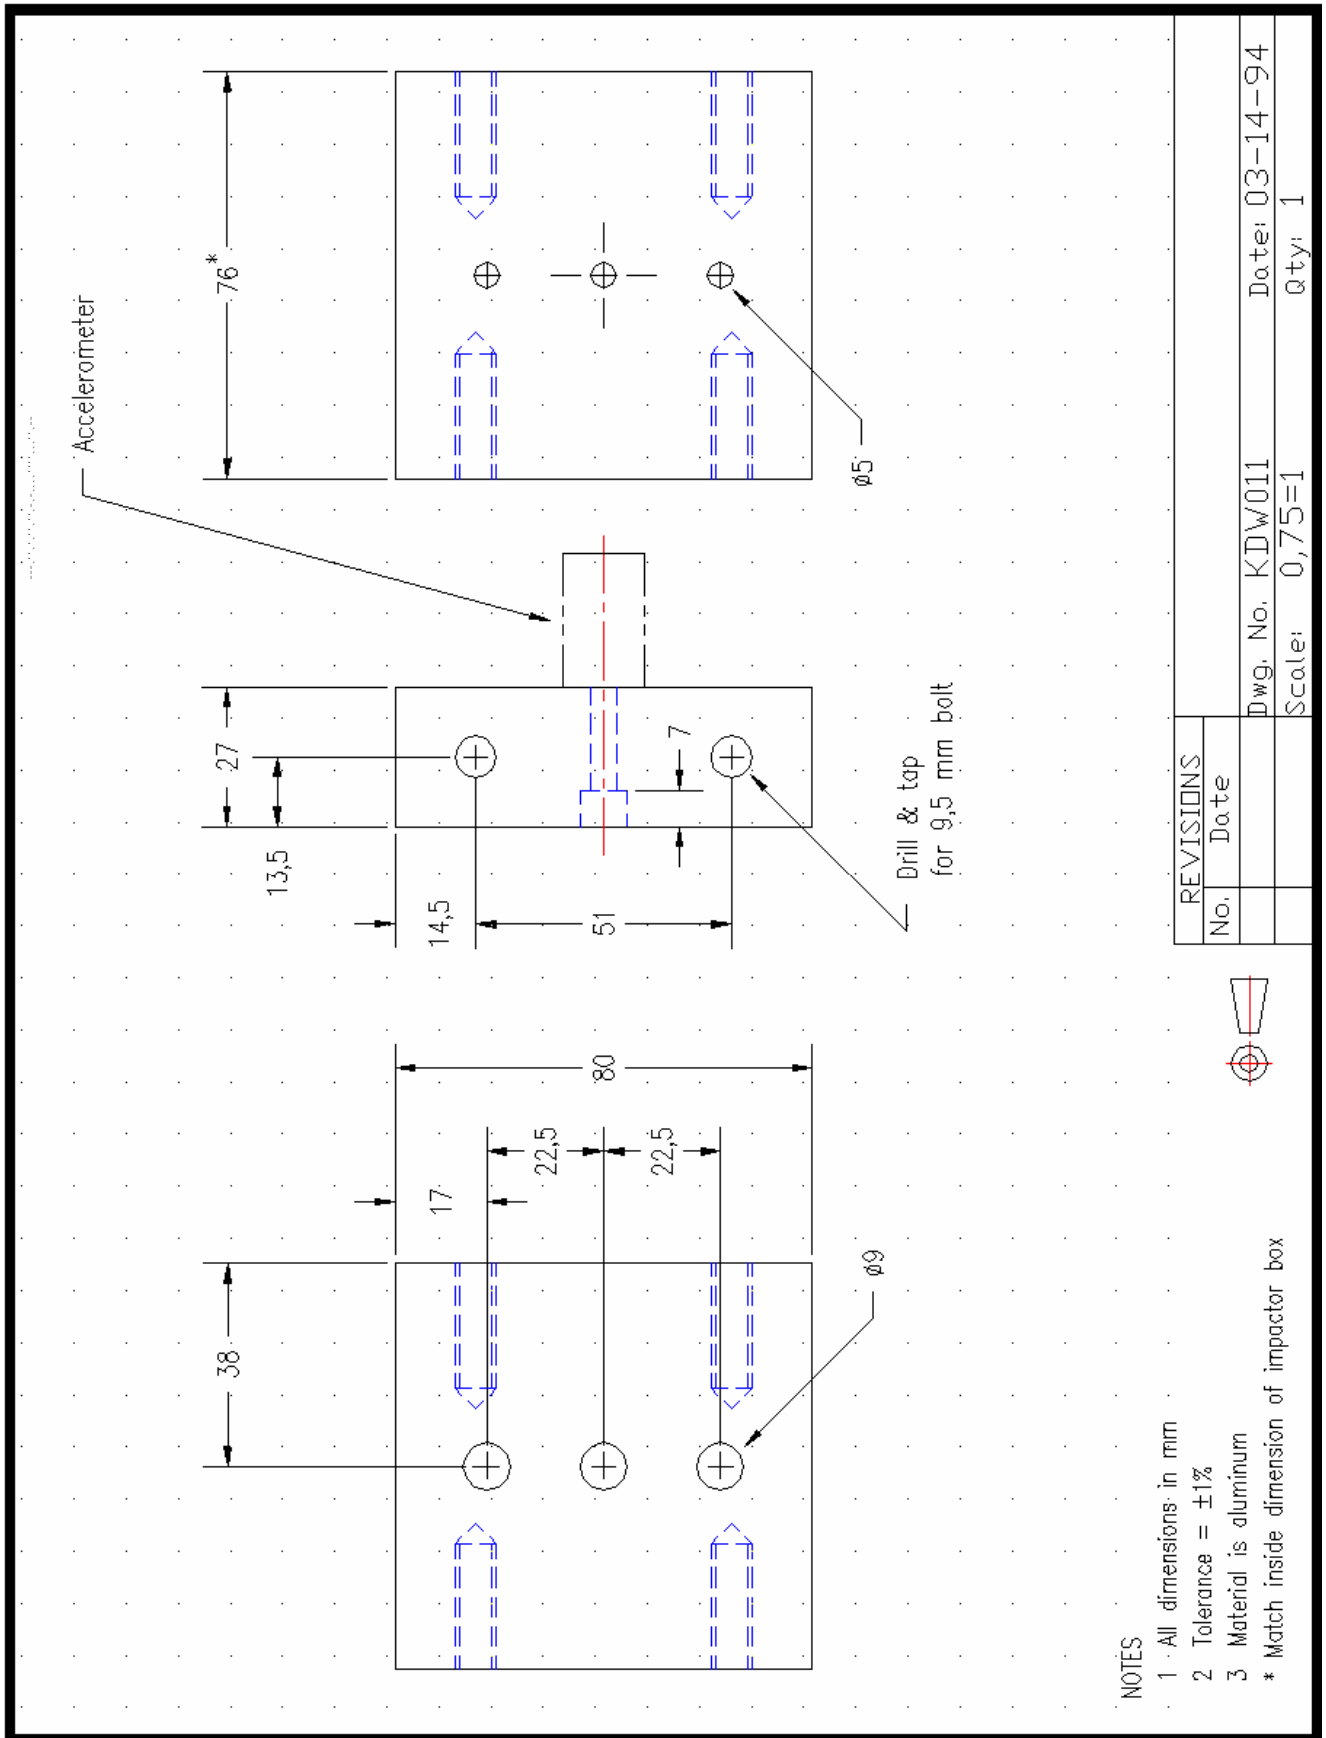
Impactor accelerometer support for the bone dynamic bending fracture tests
